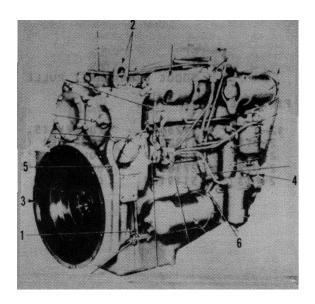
TYPICAL FAN TO FLYWHEEL
